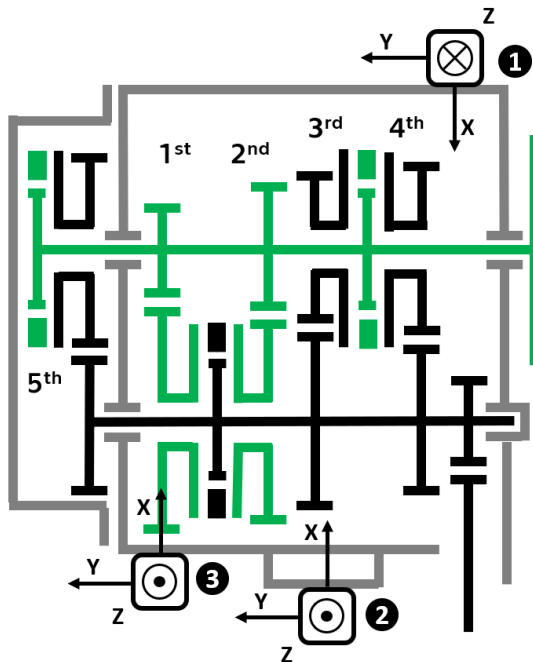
Available accelerometer positions 1 to 3 and orientations on the gearbox case
